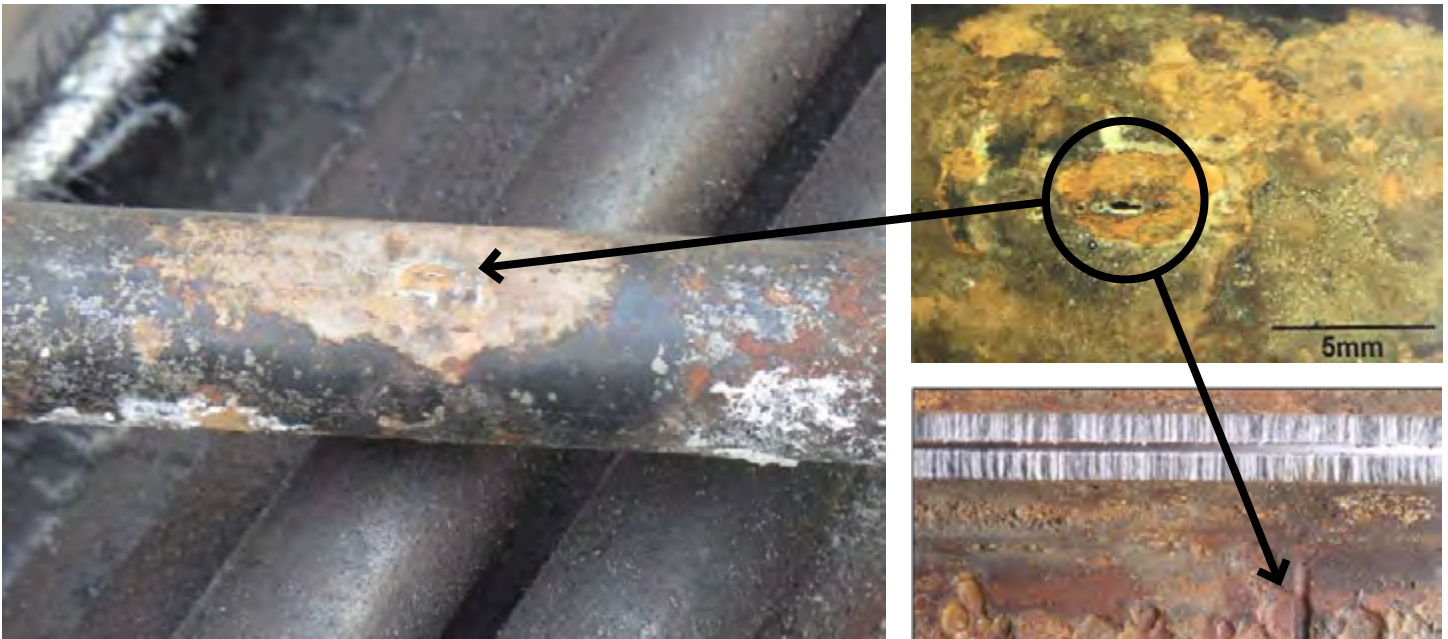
(above): outside of failed tube showing hole and corrosion due to brine spray.
